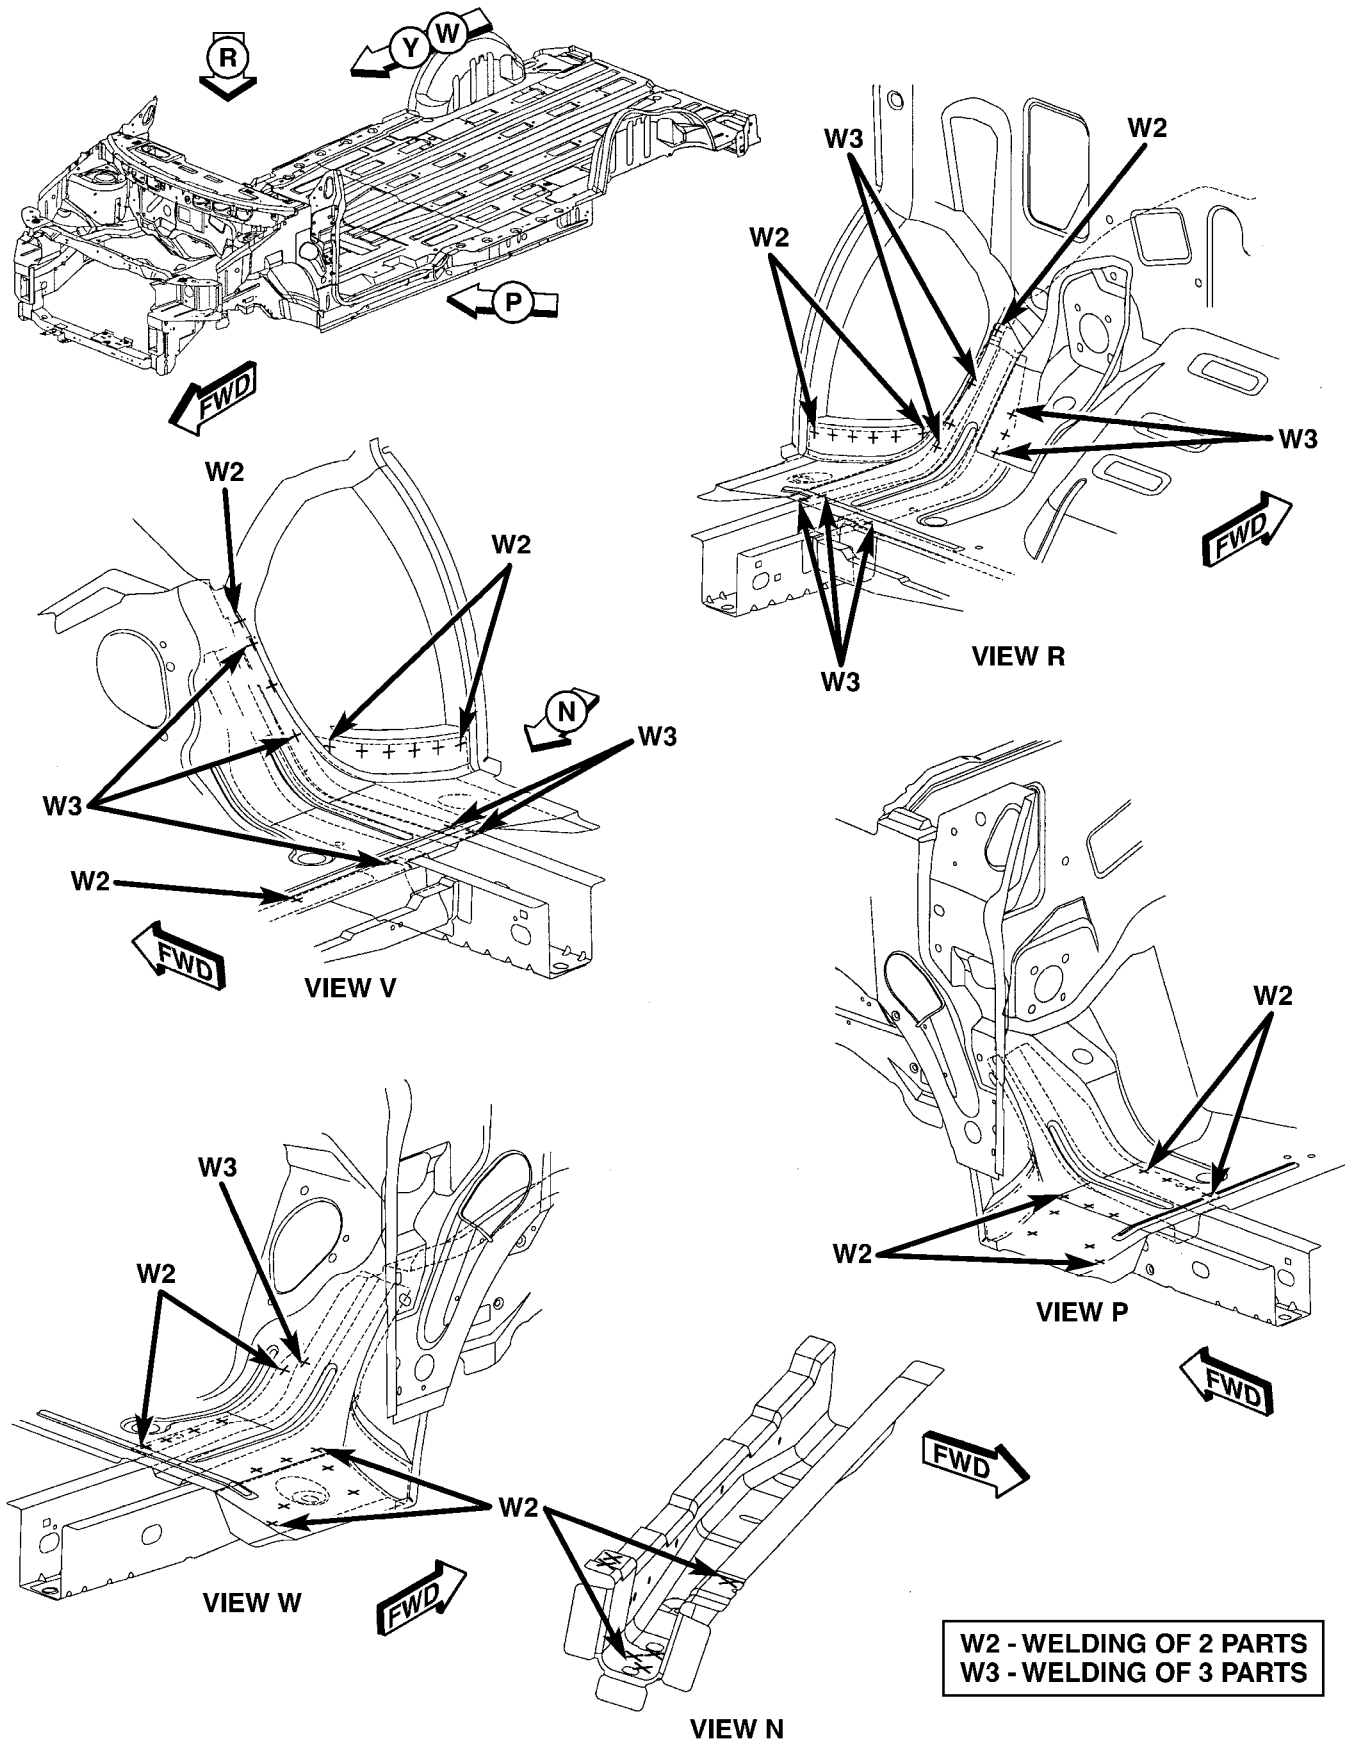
STRUT TOWER, COWL SIDE PANEL - RIGHT HAND DRIVE
